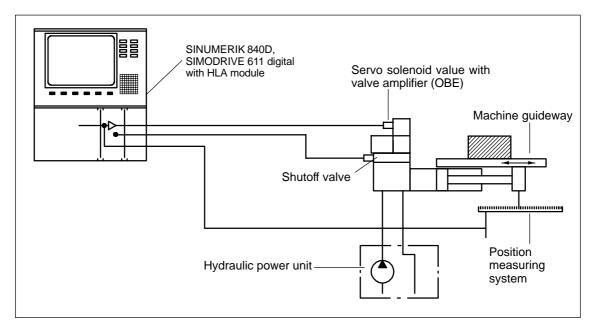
Construction of an electro-hydraulically controlled drive axis
